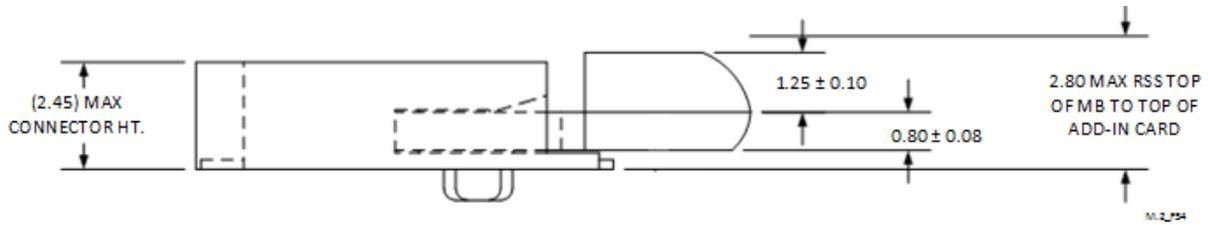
H2.5-S2 – Stack-up Top Mount Single-sided Add-in Card for 1.35 Maximum Top-side Component Height and with Higher Clearance above Motherboard
